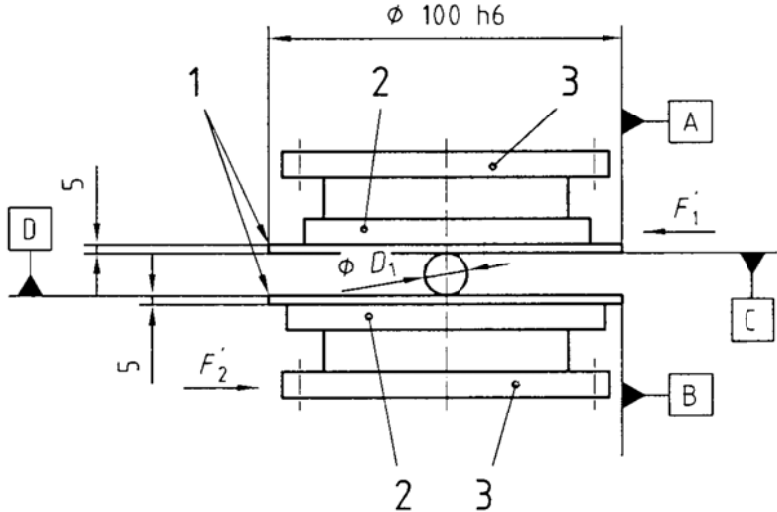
Measurement accessory for spot- and projection welding equipment (ISO 669)
